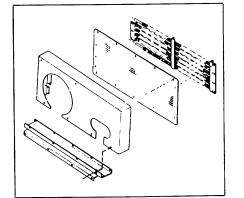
Typical Air-Cooled Aftercooler Disassembled).
